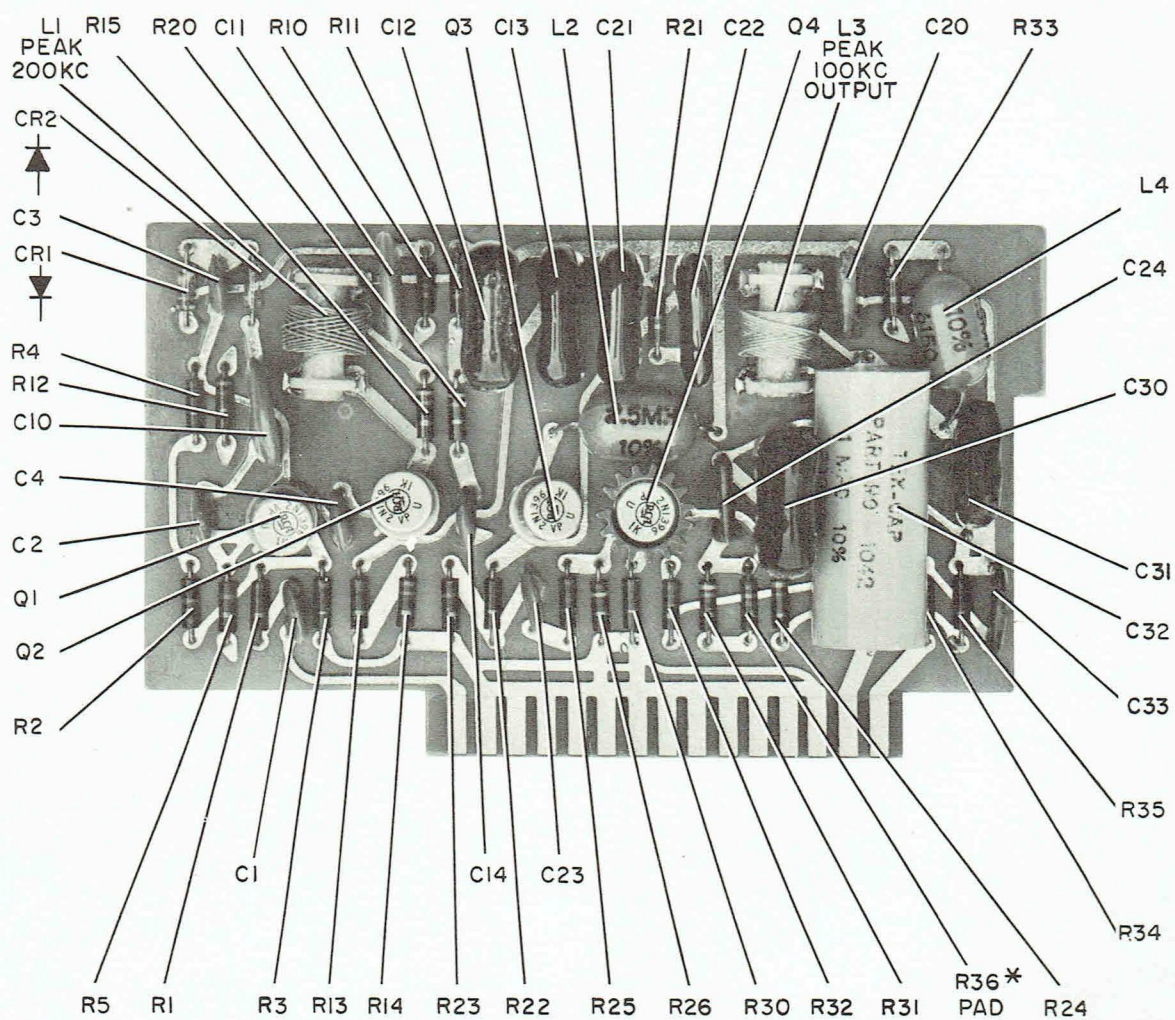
Crystal Oscillator Circuit Board A2 Parts Locations
